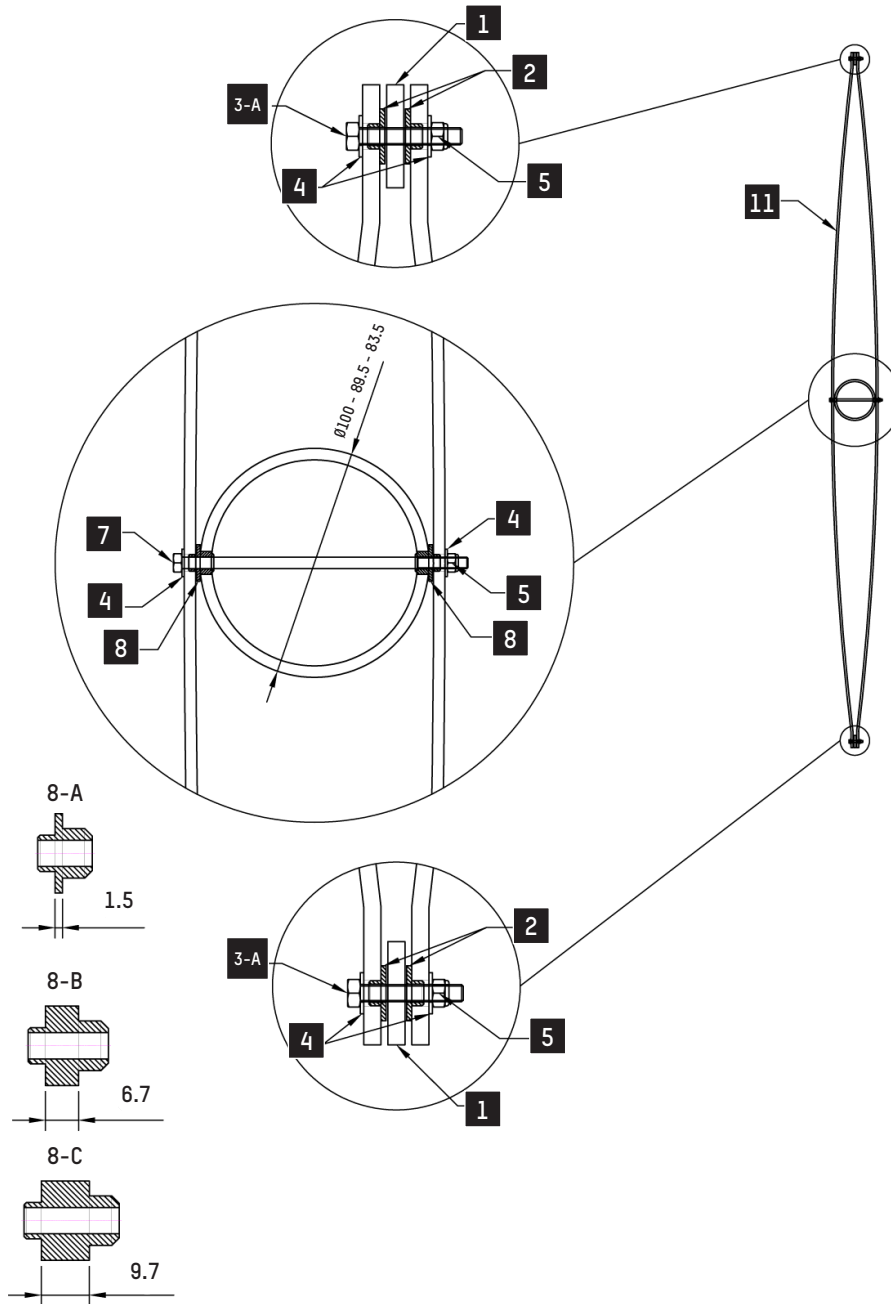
Assembly of the folding fence - Assembly of the bars
